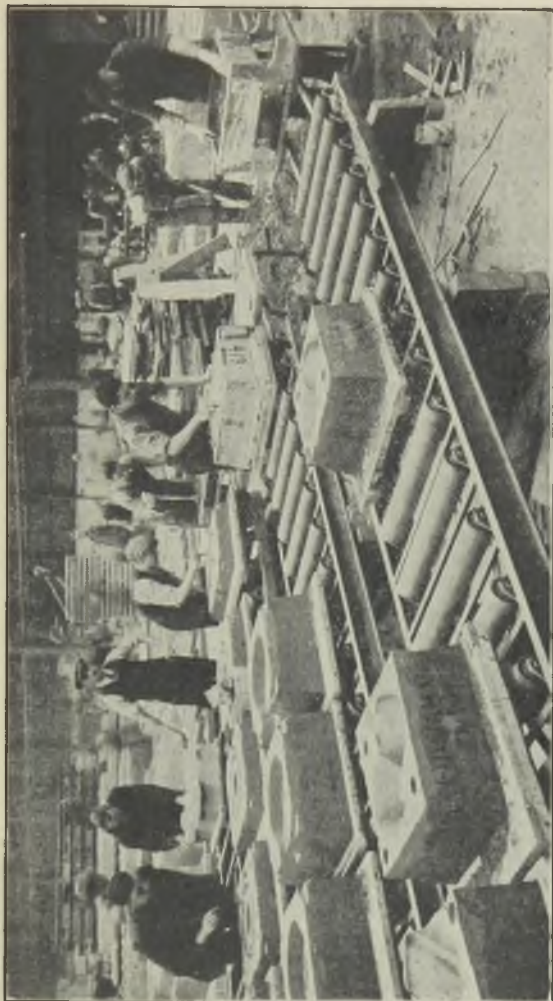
MOULDING SMALL AND MEDIUM STEEL CASTINGS ON CONVEYORS.
